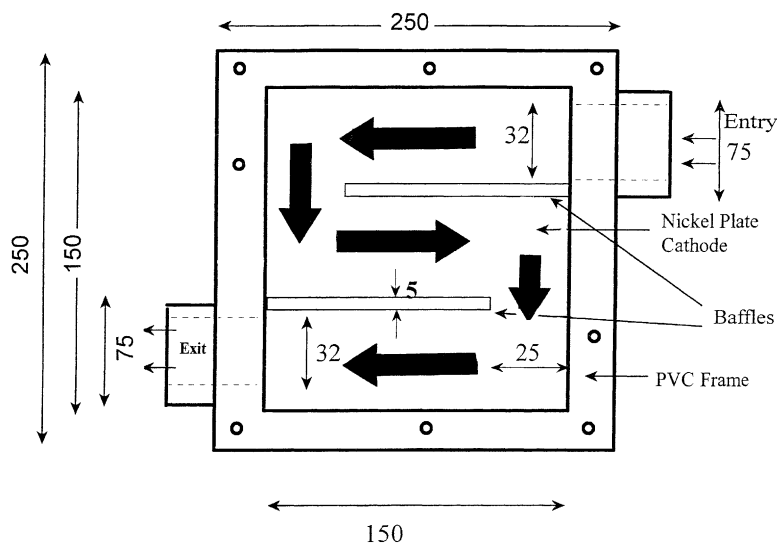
Plan view of cathode showing frame and plate (dimensions in millimetre).
